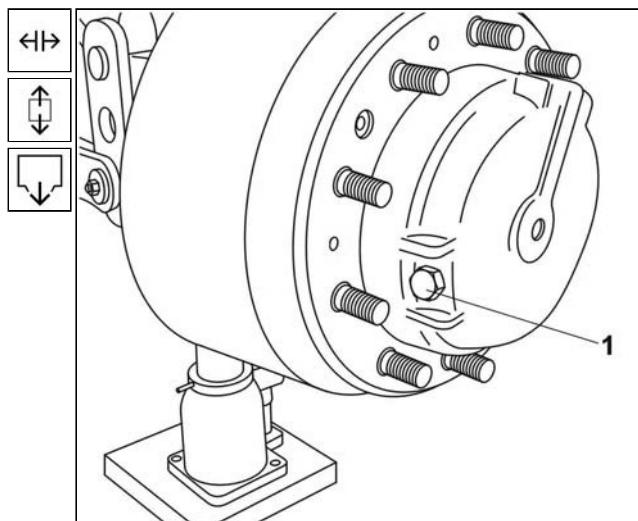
Wheel reduction gear housing oil drain plug – removal
